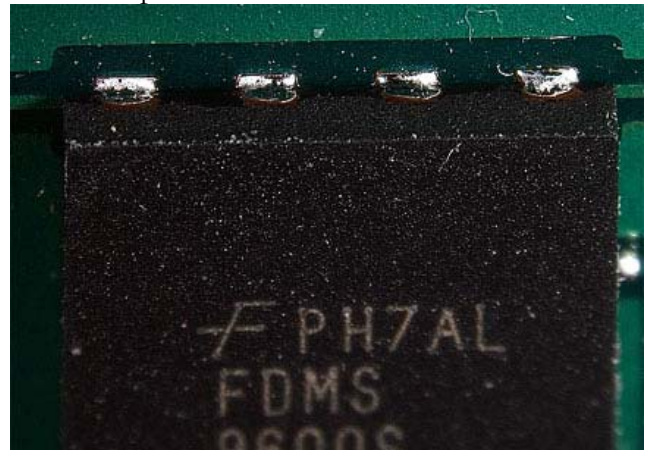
Exposed copper on package edge, with solder wetting after reflow, from singulation process.
